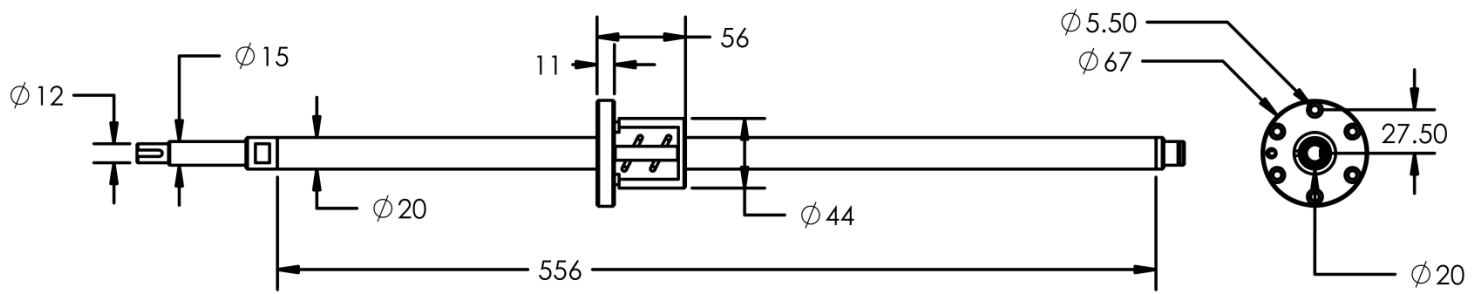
BALL SCREW ASSEMBLY (SHOWING DIMENSIONS AND MACHINED ENDS)
